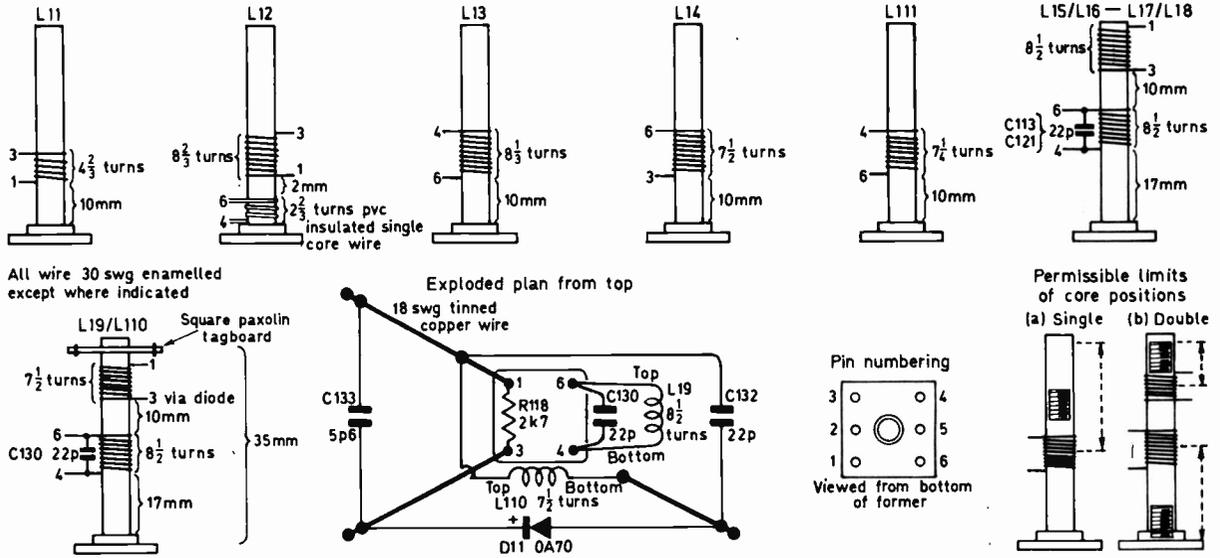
Coil winding details. Coils wound clockwise looking from top of former.
